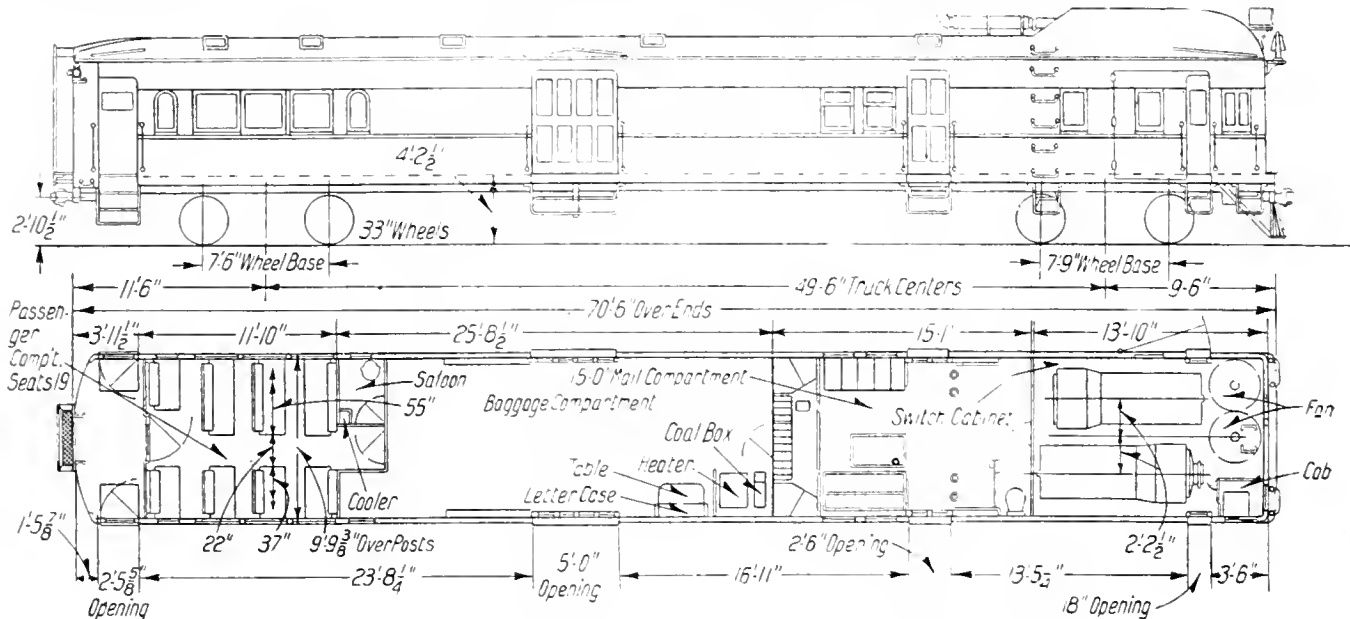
Floor Plan of Car Arranged to Handle Passengers, Baggage and Mail
